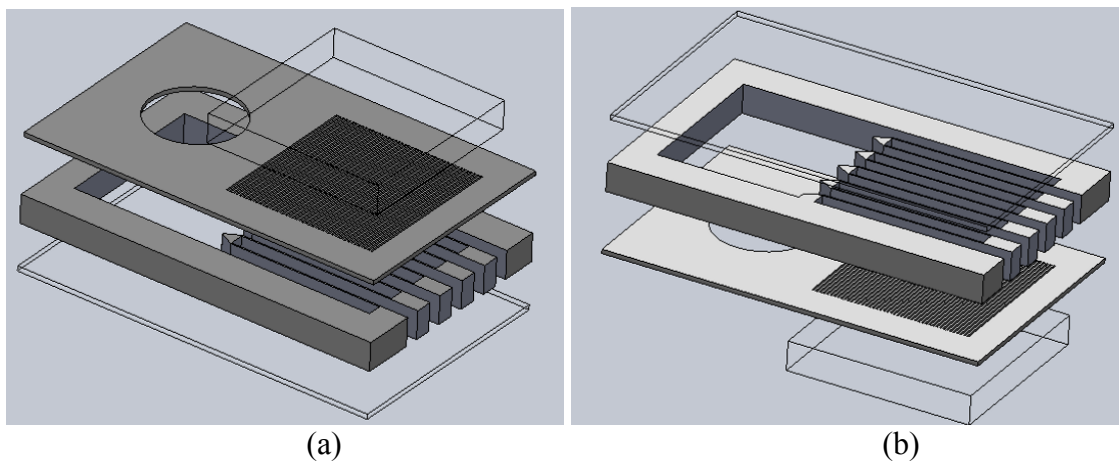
Exploded view of MMC3 showing the three wafer stack and the through etch of both the manifold and the microchannel wafers.
